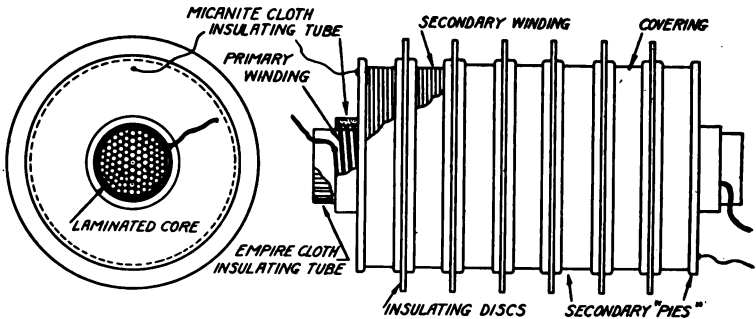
End and Side Views of Open-Core Transformer Removed from Case; No Longer in Use
